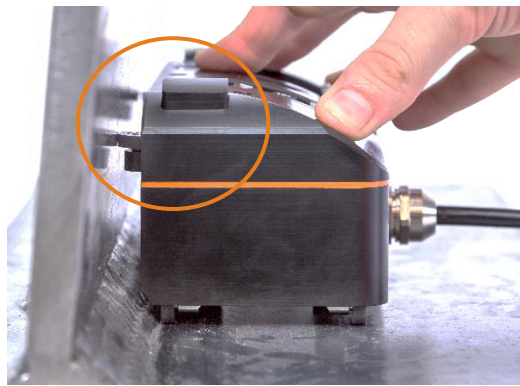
Pressing the side wheel adjustment buttons will trigger the mechanism
